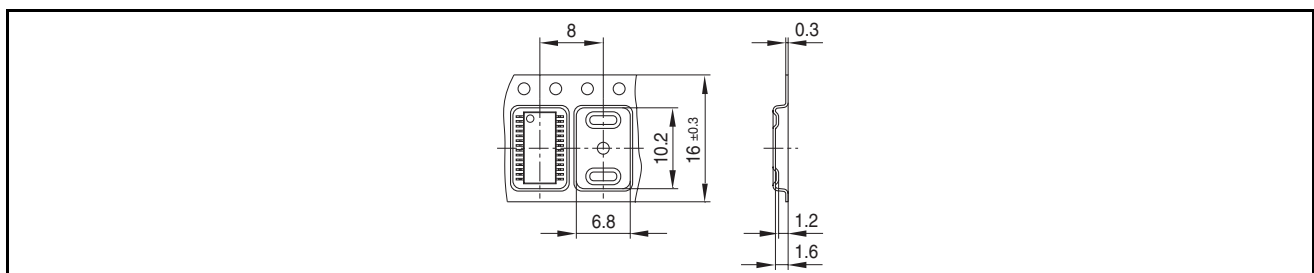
Tape & Reel Dimensions P-TSSOP-28-1/2
